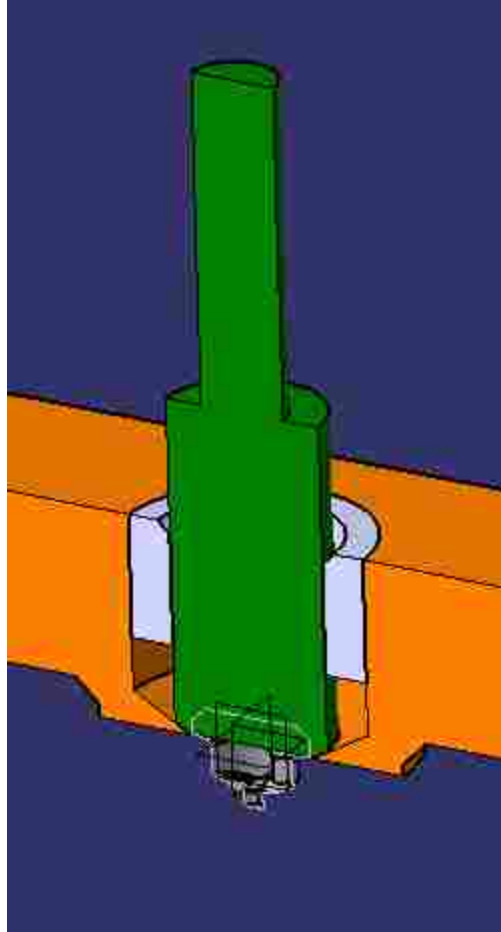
Section View of Flash Removal Clamp with Bushing
